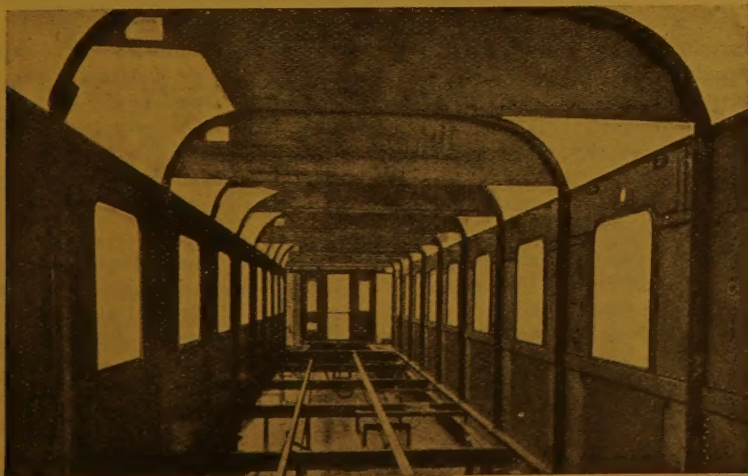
Walling, floor frame, and traverse roof ribs erected.
